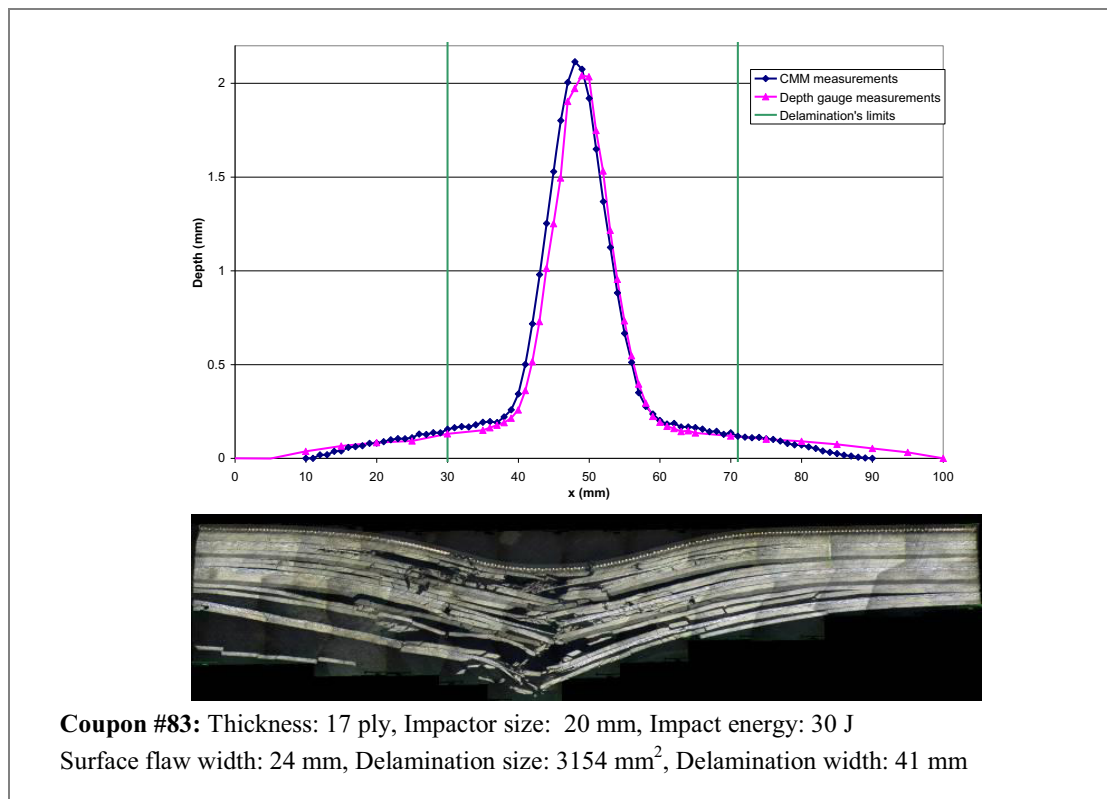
Graphical representation of depth gauge, CMM and C-Scan measurements of impact damage and surface flaw on a coupon
